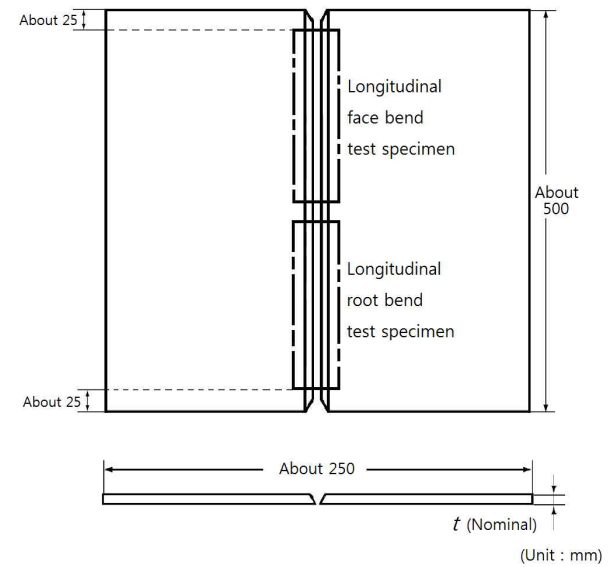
Dimensions and types of test assembly for butt welds(For 9%nickel alloys)
